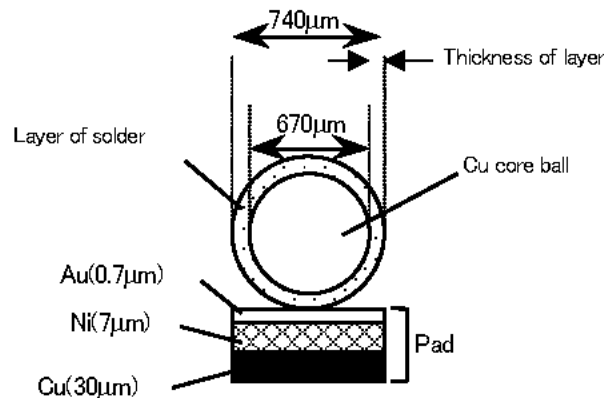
Schematic illustration of BGA sample using Cu-core solder ball
